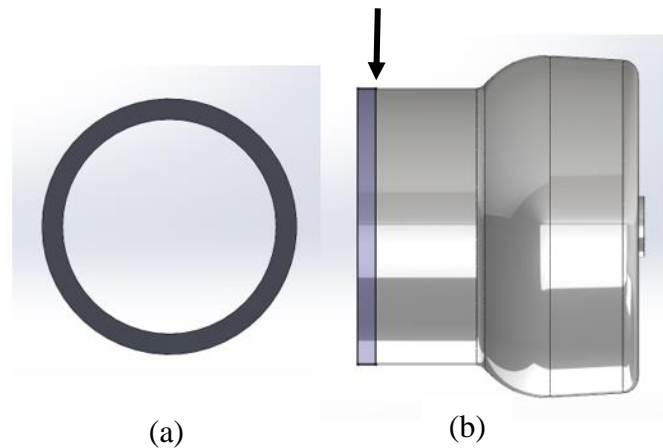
(a) Ring Shaped Specimen (b) Location of where Ring Specimen would be cut from original PMV Design
